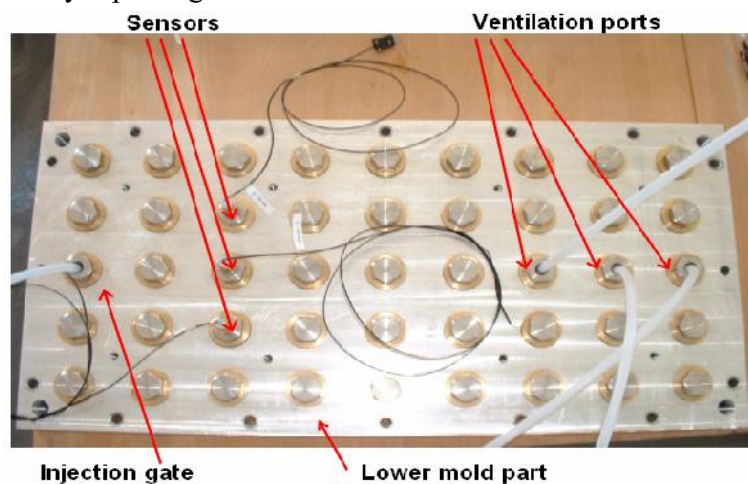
Bottom view of the lower mold part. There are 45 multi-functional bolts on the mold part. In this injection, 1 injection gate, 3 ventilation ports, and 3 sensors are used, and all the other multi-functional bolts are used as solid (i.e., no function).
